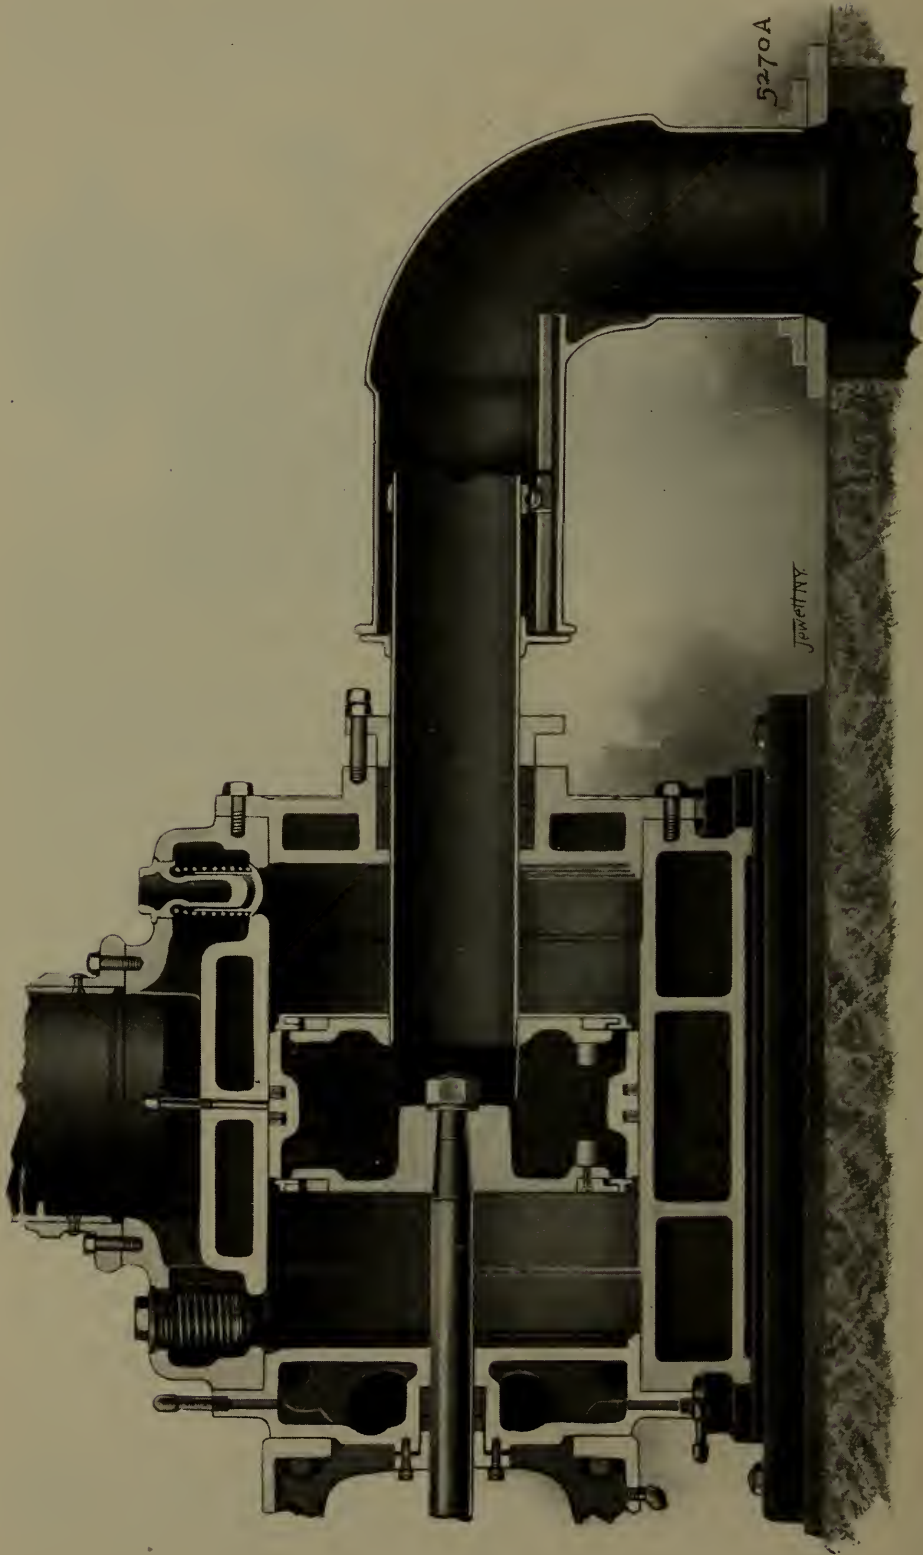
A cross-section through a Hurricane-Inlet valve cylinder. The valves are located in the air piston faces.
